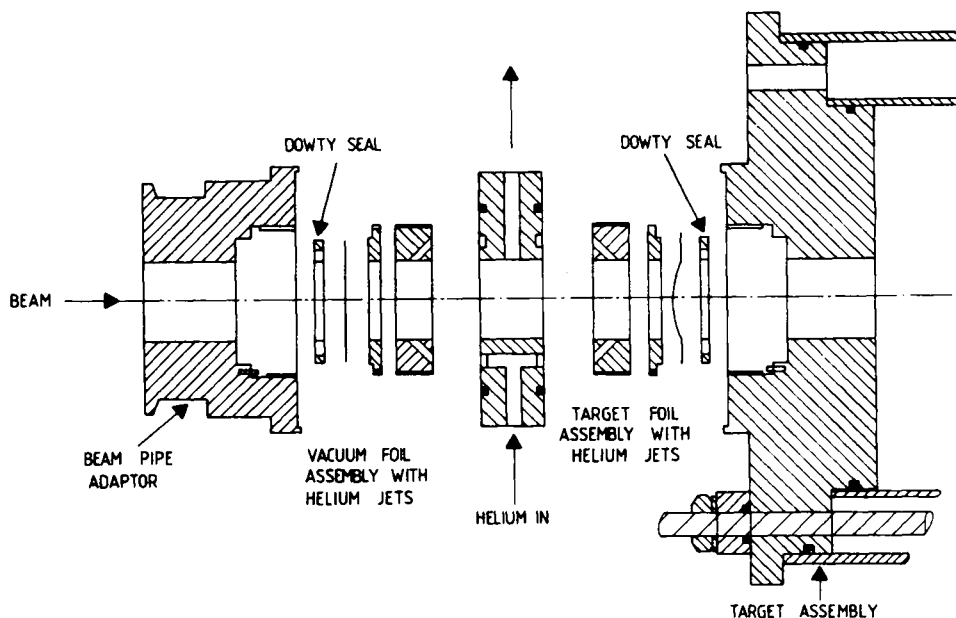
SKETCH OF FOIL ASSEMBLY AND ARRANGEMENT OF HELIUM COOLING
